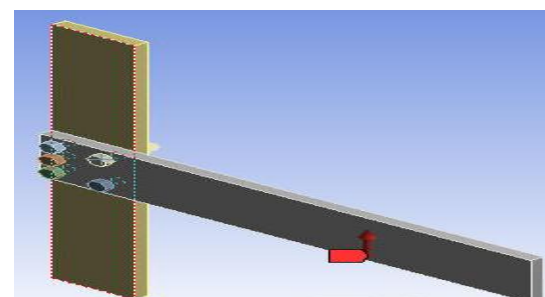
Unsymmetrical eccentric loaded bolted joint
